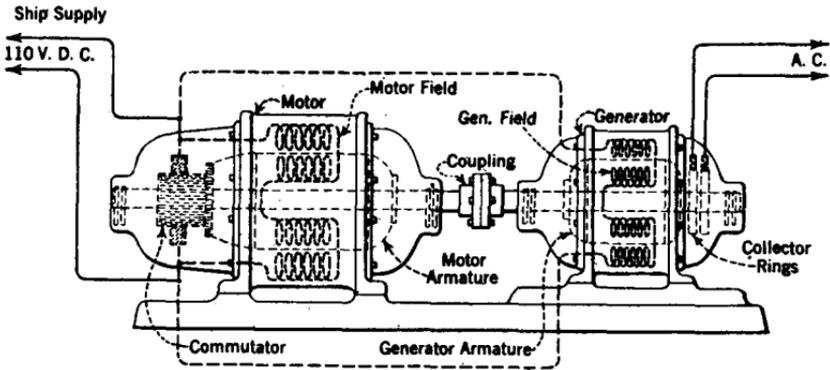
Detailed view of a complete motor-generator set of a radio transmitter.
